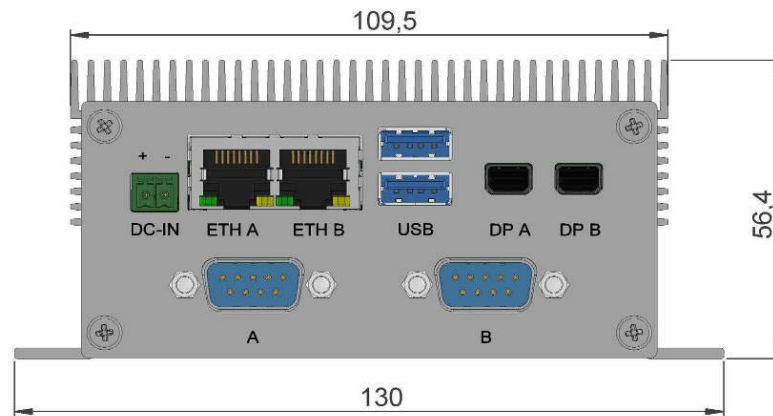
MBox-R-E39, Dimensions (mm), Front View
